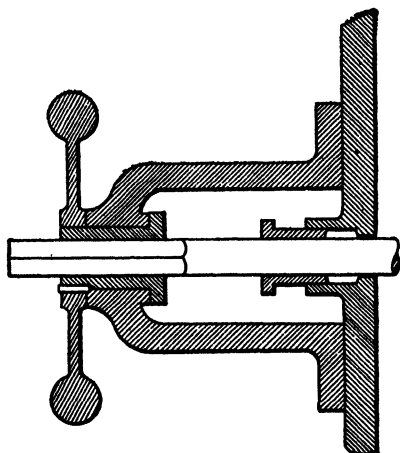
Stuffing Box and Valve Spindle of Meyer Gear
